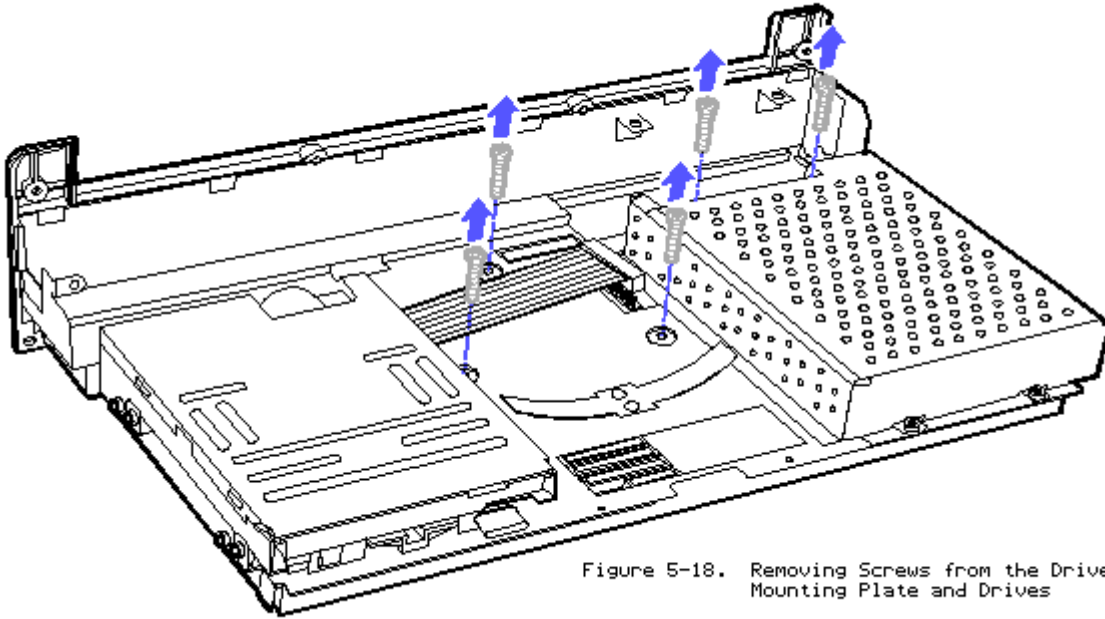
Removing Screws from the Drive Mounting Plate and Drives
